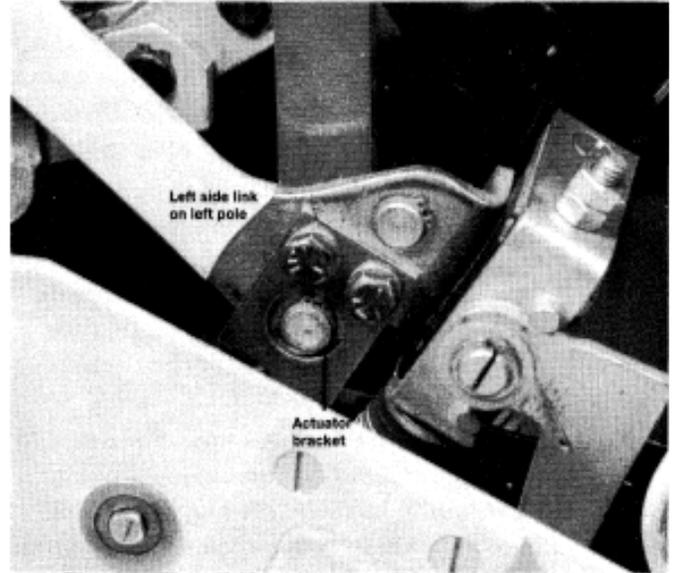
Flux Shifter Actuator Bracket Installation
